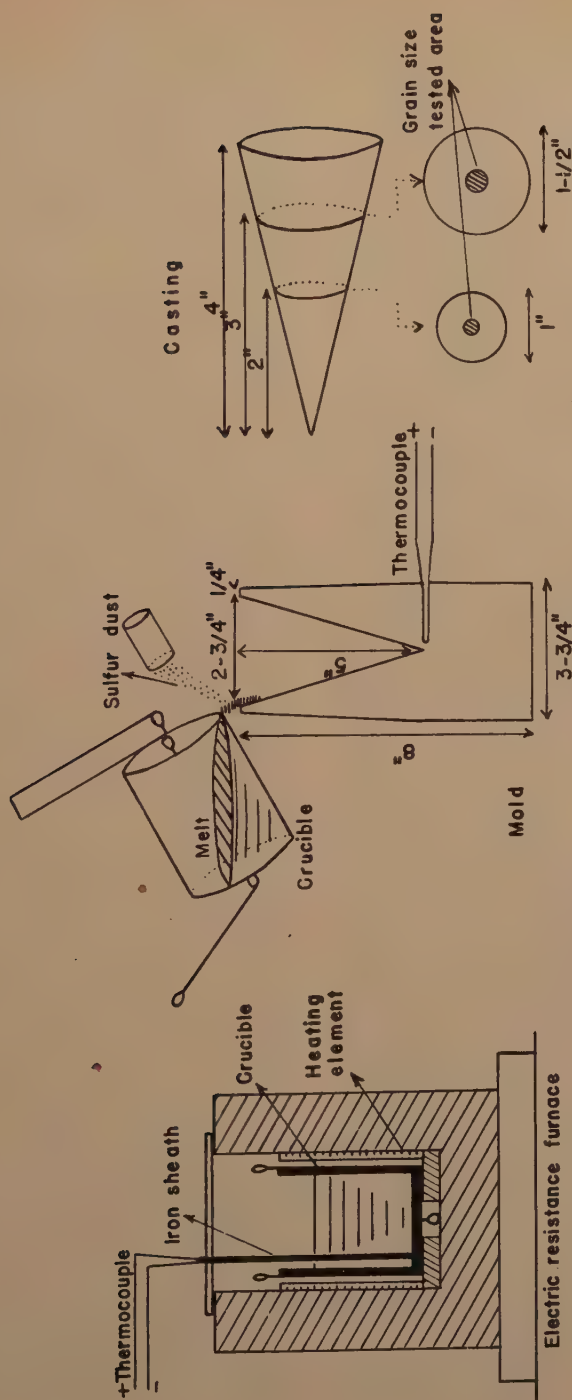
EXPERIMENTAL ARRANGEMENT FOR MELTING AND CASTING.
